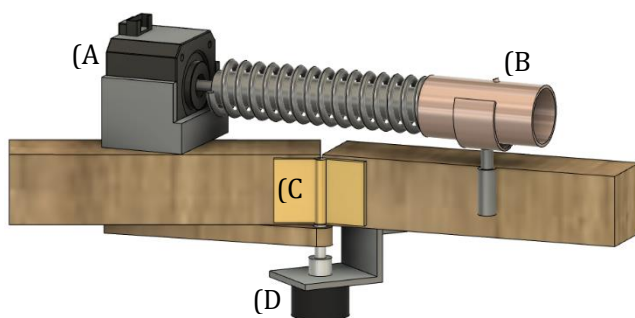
3D Mockup of final design: (A) Motor Upper Section. (B) Spring Rod Lower Section in Pipe. (C) Hinge "Knee" Joint. (D) Potentiometer.
